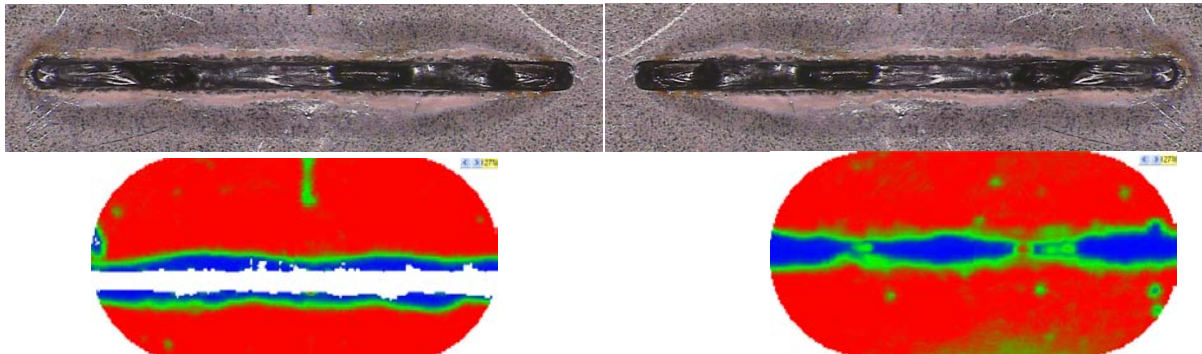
Weld top bead (0.4mm gap, sample C) and Amstech result from top bead (L) and bottom bead (R)
